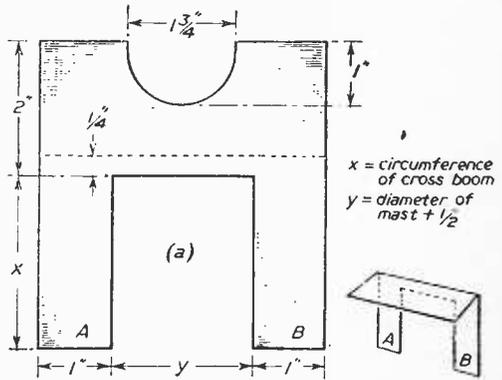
Details of the fixing clamp which can be seen in Fig. 3.
